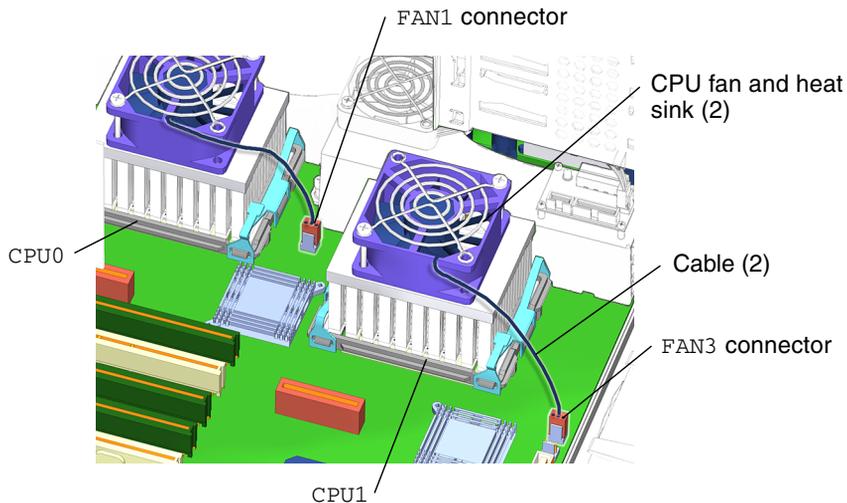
Connecting CPU Fan and Heat Sink Assembly Connectors
